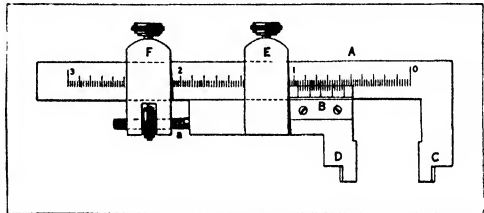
VERNIER CALIPER (A) BEAM. (B) VERNIER. (C) FIXED JAW. (D) MOVABLE JAW. (E) CLAMPING HEAD. (F) ABUTMENT HEAD WITH ADJUSTING SCREW. a, FOR ADJUSTMENT OF D
